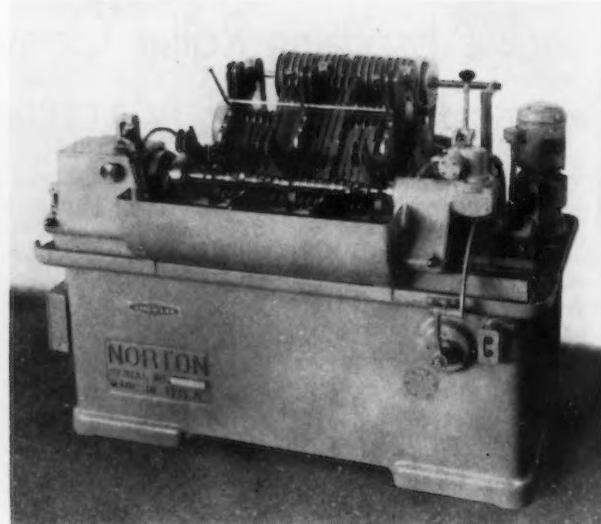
Crankshaft lapper with abrasive paper applied to 19 cam and bearing surfaces.
